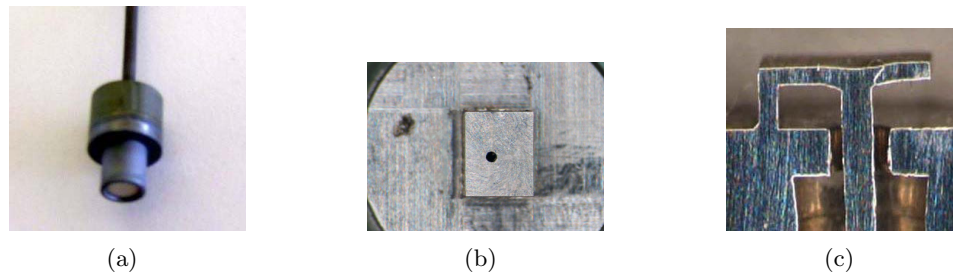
PIFA probe prototype - outer shell (a); insight, top view (b) and side view (c).
